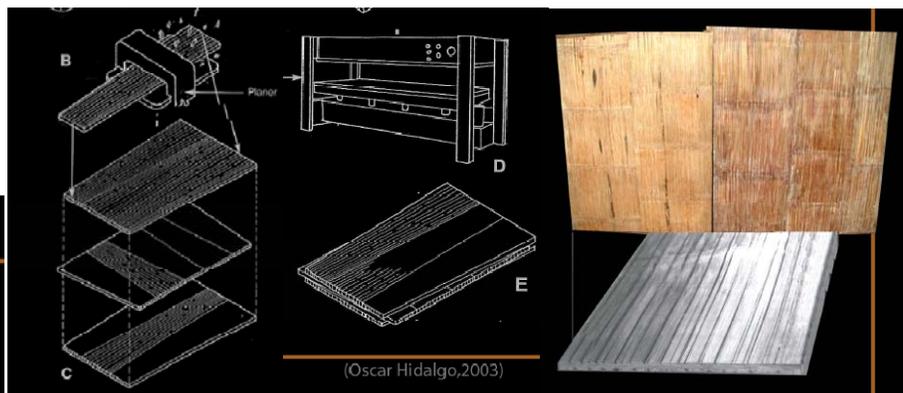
Bamboo floor panels typical manufacturing process (Hidalgo, 2003).
